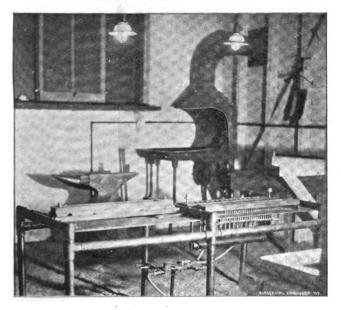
MOULDING DEPARTMENT, COX LABORATORY.
